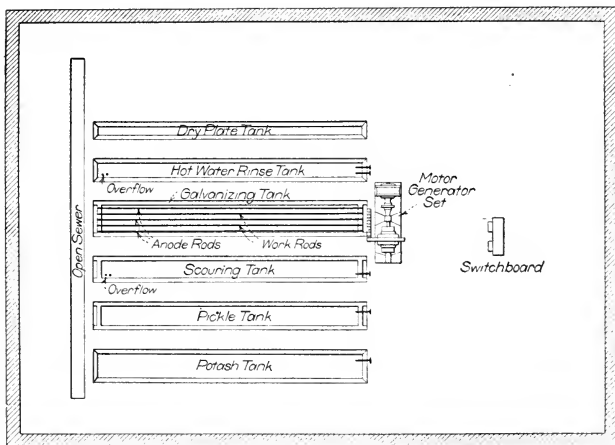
FLOOR PLAN OF ELECTRO-GALVANIZING PLANT
